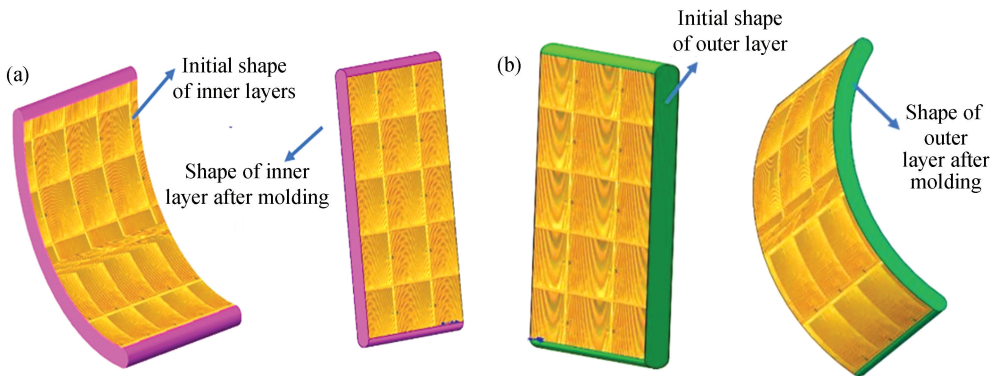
(a) The initial shape of the inner layer and the shape after molding; (b) The initial shape of the outer layer and the shape after molding
